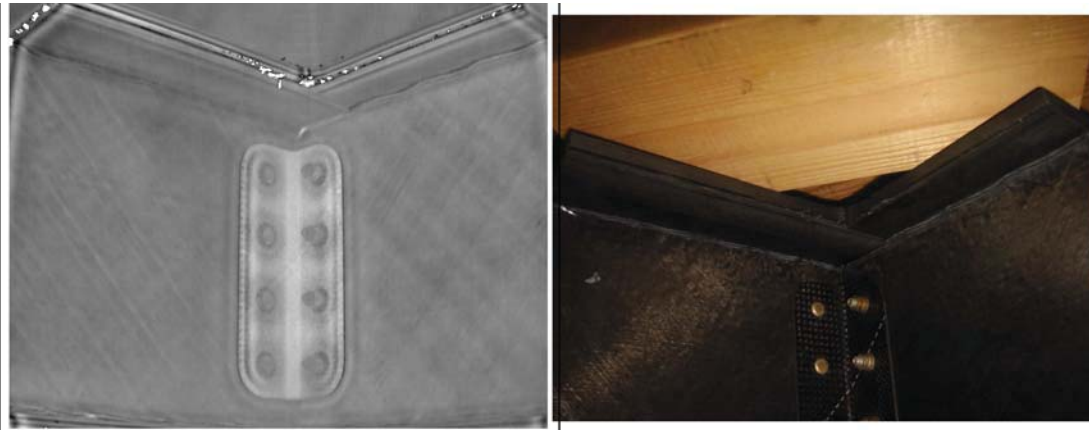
Thermal inspection results for cruciform 1, rivet 4 top.
